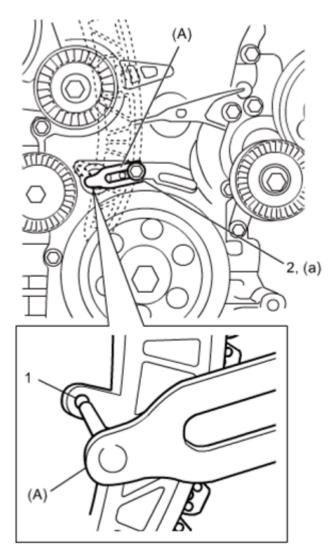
Identifying Special Tool Fixing Bolt Courtesy of SUZUKI OF AMERICA CORP.
